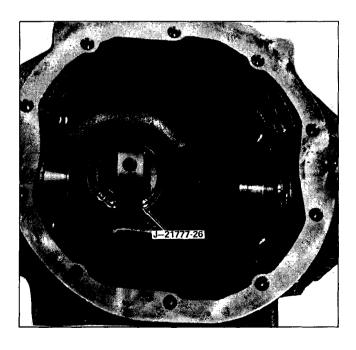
A-34 Pinion Gauge Tools Installed - B Series
